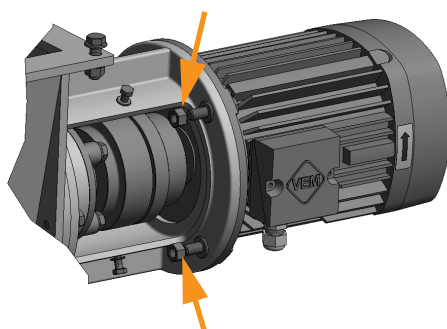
Bearing housing (drive side): Remove fastening element on bearing housing/motor.
